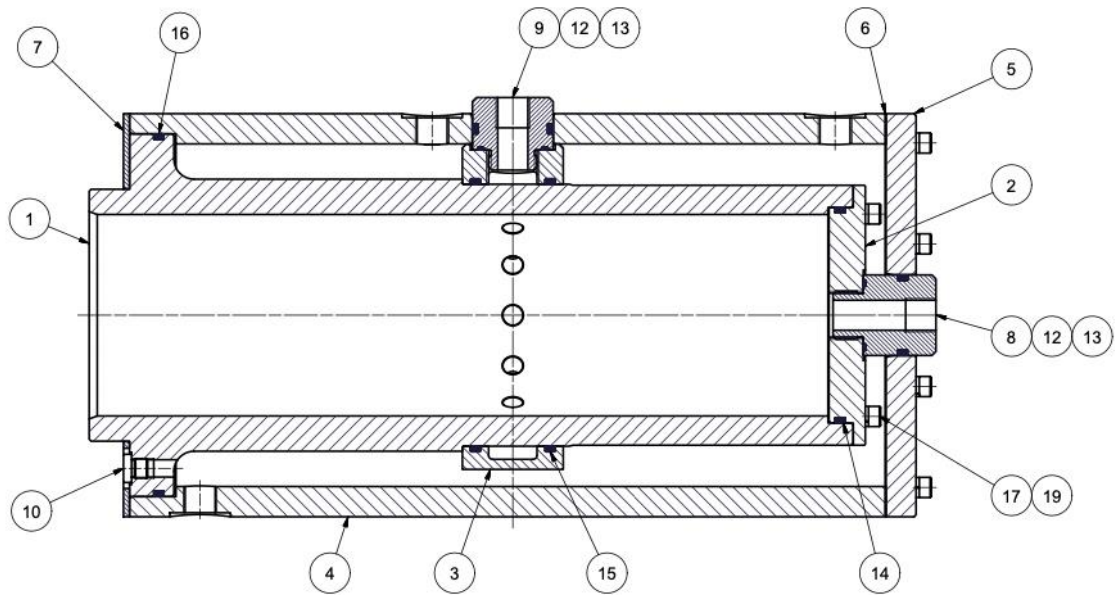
Section of 'Sub Assembly of Expansion Cylinder' technical drawing produced by the University of Southampton EDMC for this project. Section highlights the multiple ports and manifold and steam jacket assembly. (1) = Cylinder body. (2) = Cylinder end cap. (3) = Exhaust manifold. (4) = Steam jacket body. (5) = Steam jacket end plate. (6) = Cylinder gasket. (7) = Cylinder insulation ring. (8) = Cylinder inlet port. (9) = Cylinder exhaust port. (10) = Hydraulic blanking plug. (12 – 16) = O-rings. (17) = Screw. (19) = Washer.
